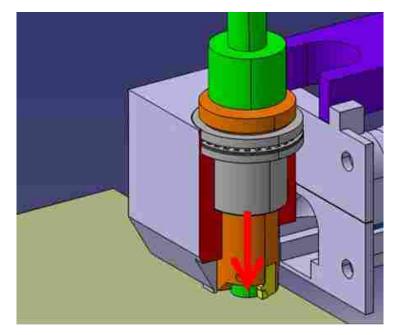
The Correct Depth is Reached and the Weld is Completed
